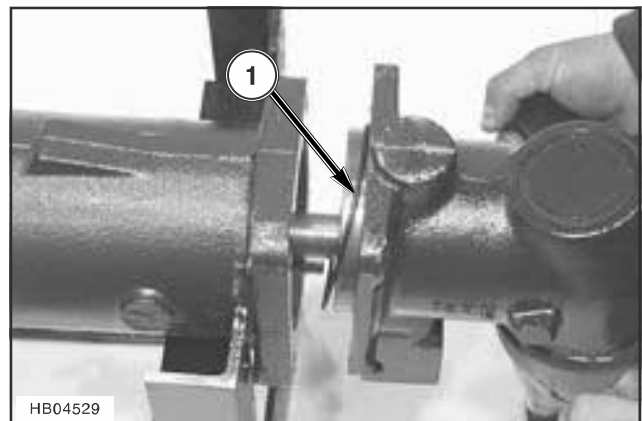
A-09: Remove pinion shaft oil seal. Remove snap ring from pinion shaft.
